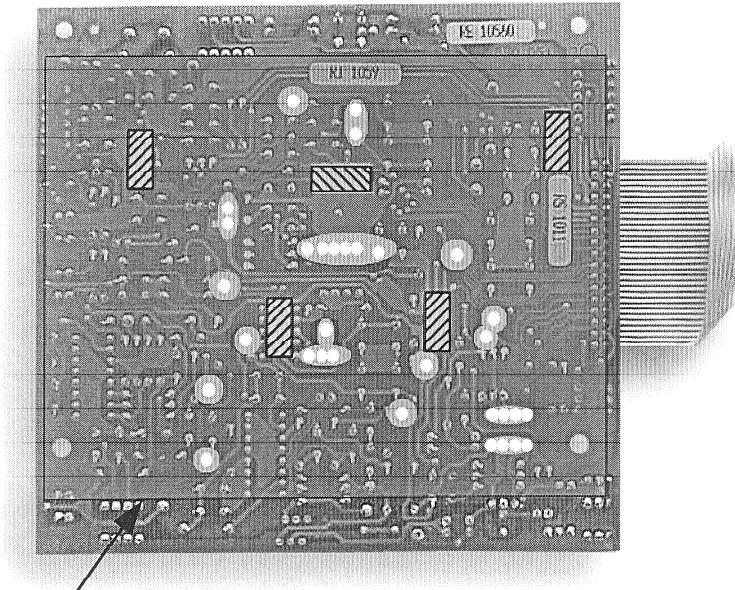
Cut pin and wire ends on Servo Board; Insulating sheet w. 2 holes, fixed on solder side with 5 pcs. of self-adhesive foam tape
